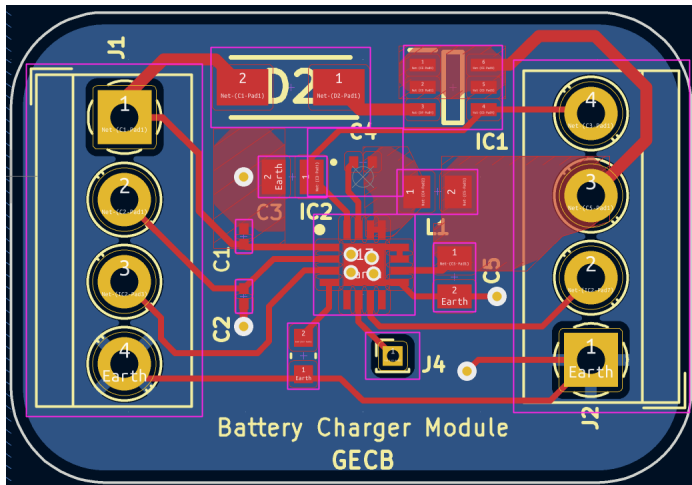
PCB Layout of Battery Charger (29mm x 20mm)
